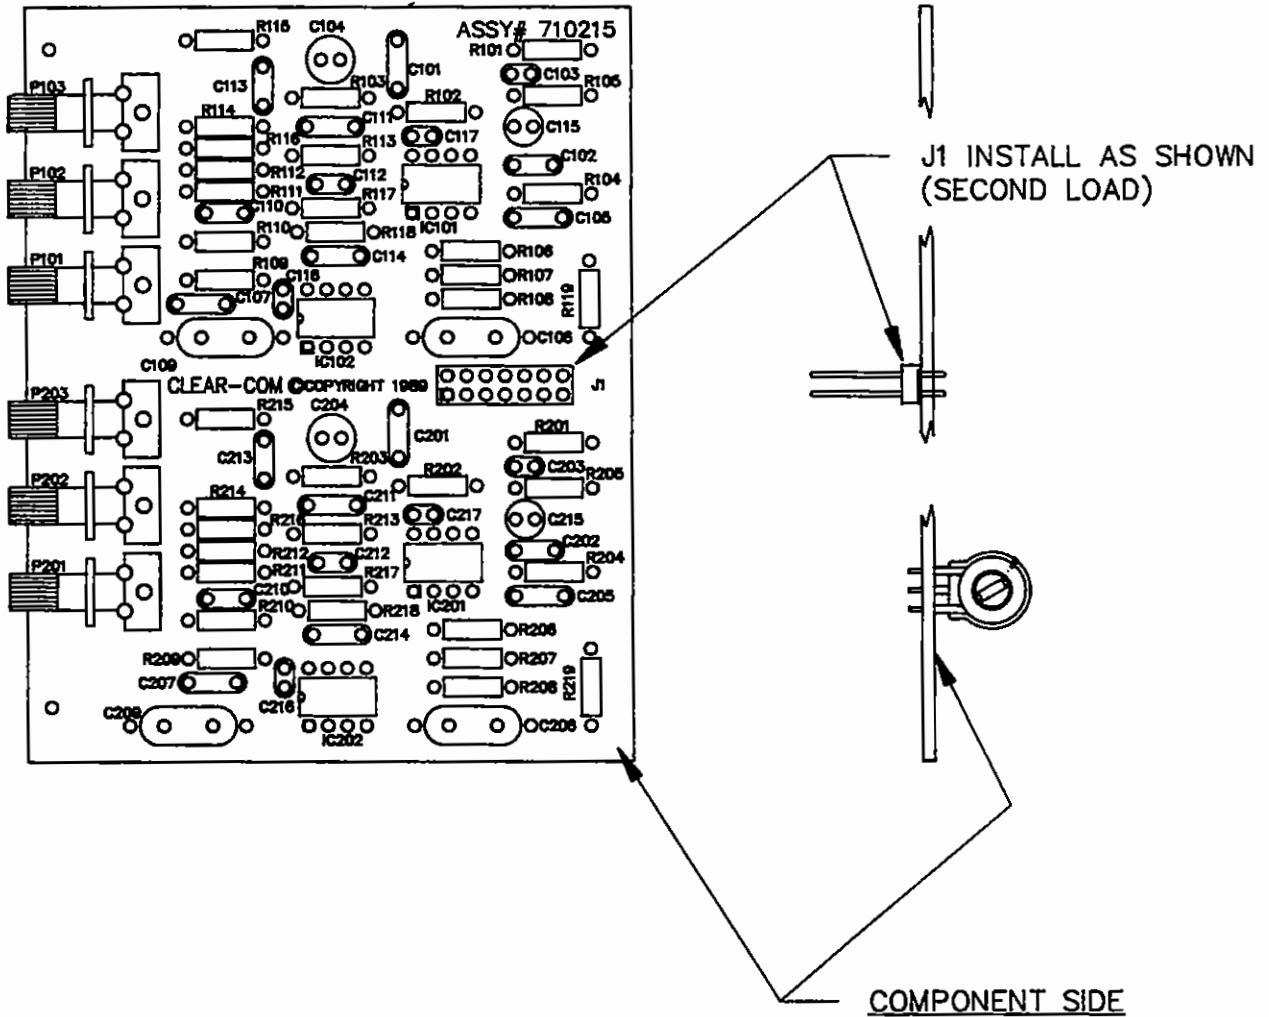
Assembly Drawing - CCI-22 Null PCB, Rev. D
